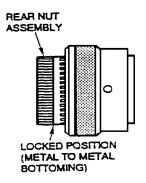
Contact Insertion, Front (Gang) Release (Sheet 2)
